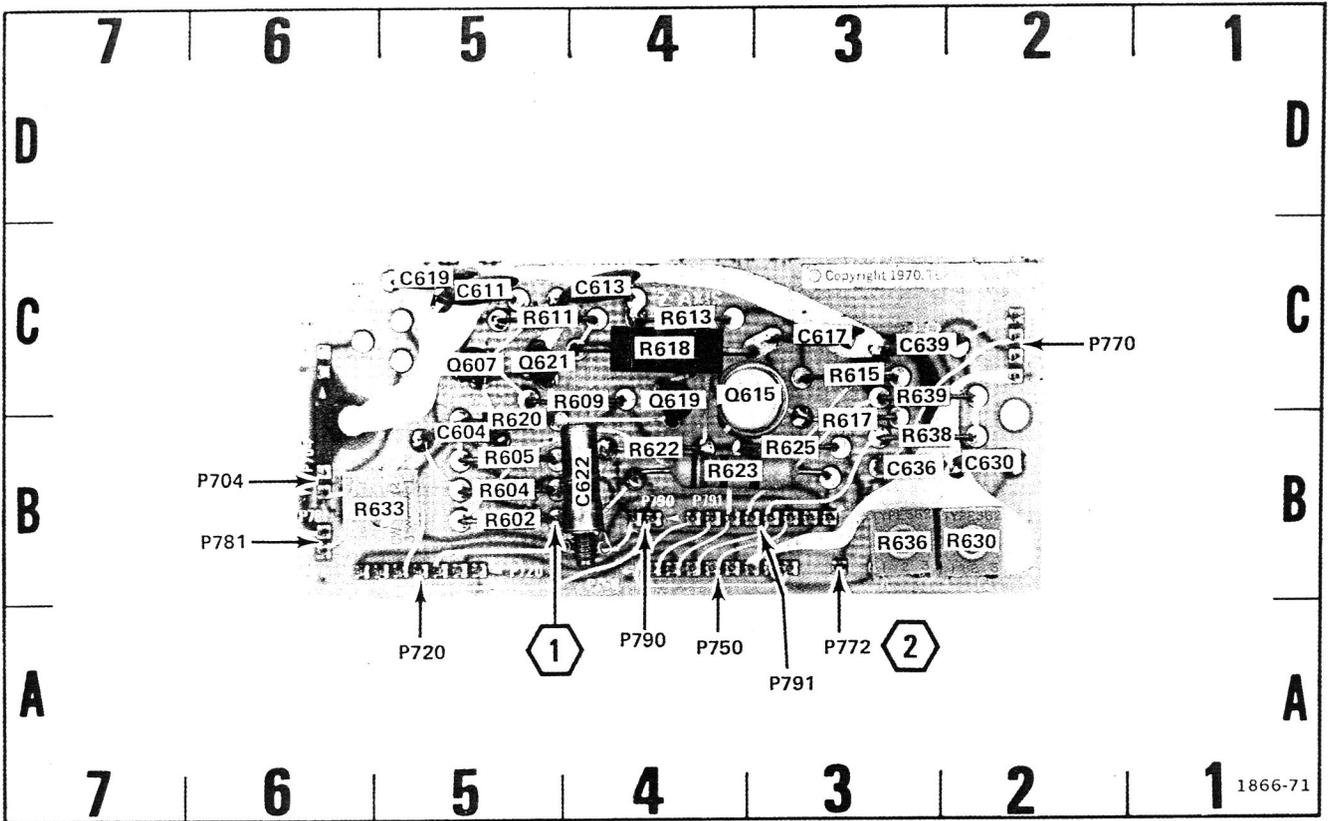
A8-Z-Axis Amplifier circuit board assembly.
